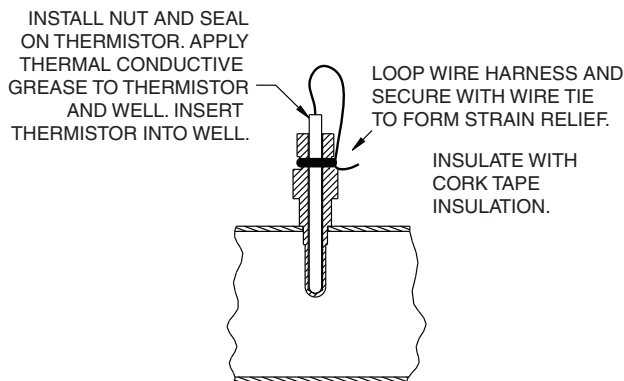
Return Gas Thermistor (RGT) Mounting
